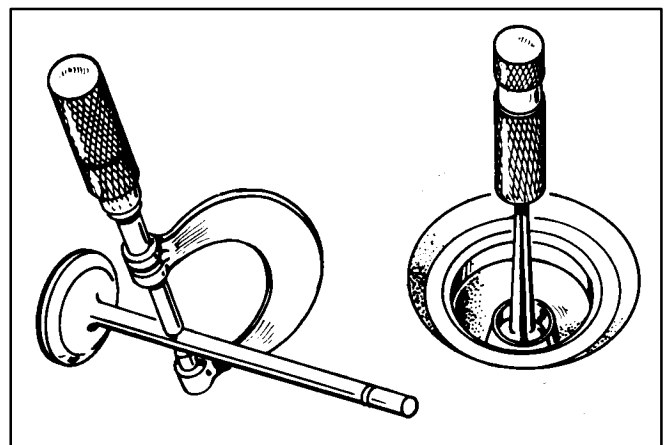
VALVE STEM AND VALVE GUIDE BORE DIAMETERS
